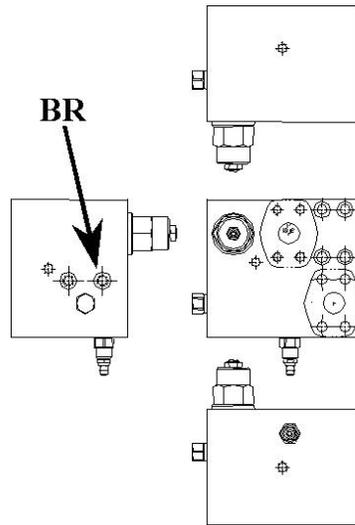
Hook winch brake manifold – (BR) brake release port – mounted on hook winch {11}.
